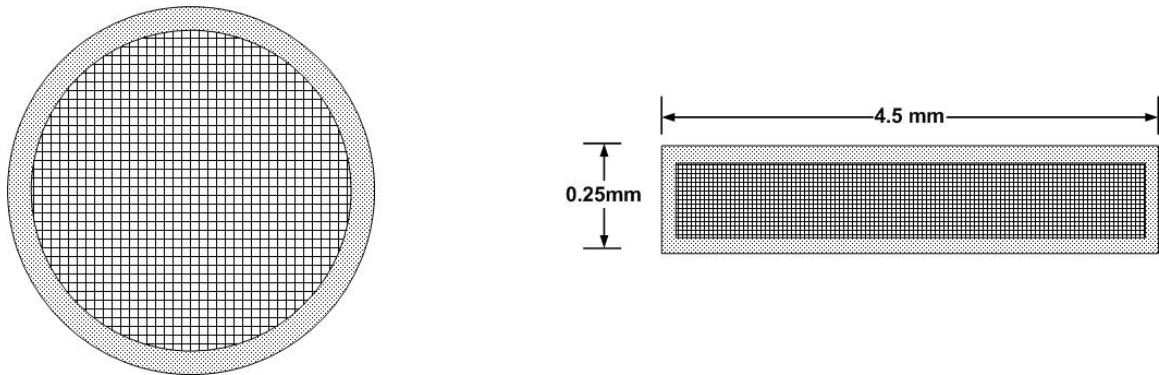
Fabrication of BSCCO HTS tape using the OPIT technique. Ag/alloy cylinder with meshed cross-section (left) and fabricated HTS tape (right) with typical dimensions.
